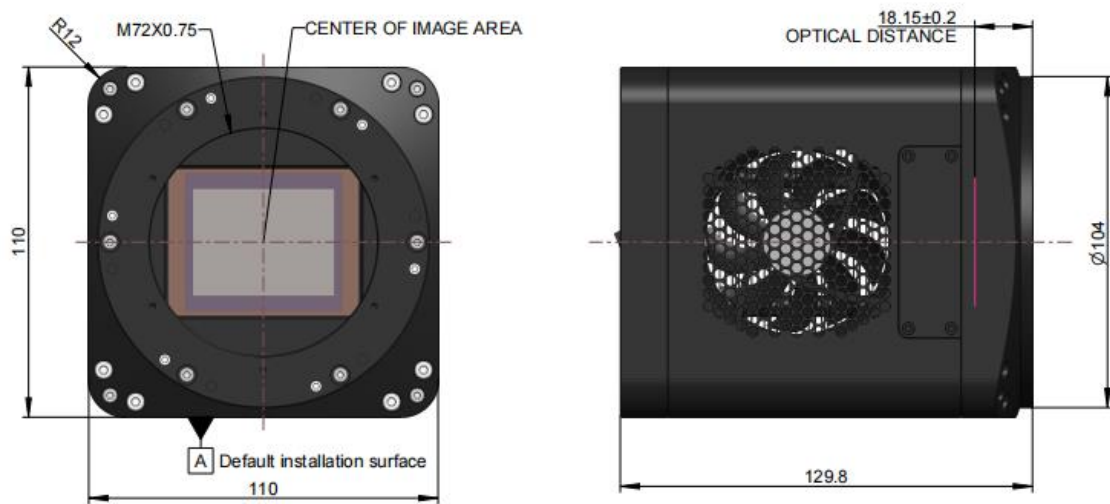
MaxCam-461M/C-TE dimensions (mm)
